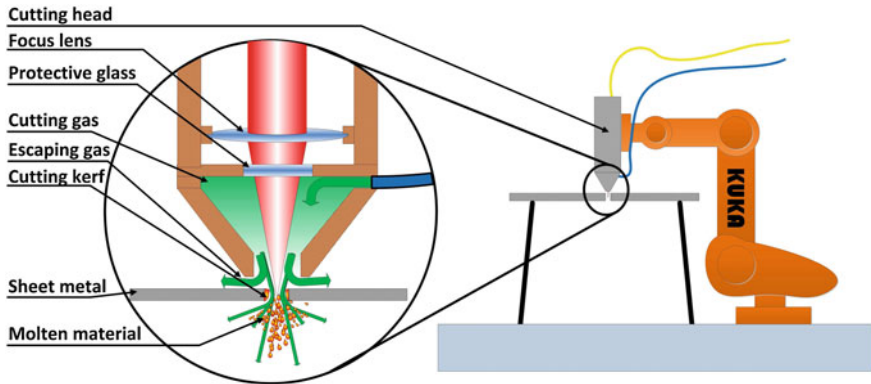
A sketch of traditional laser cutting. A laser beam (*red*) melts the sheet metal being cut (*grey*), and a cutting gas (*green*) is applied to blow away molten material from the cutting kerf (Color figure online)
